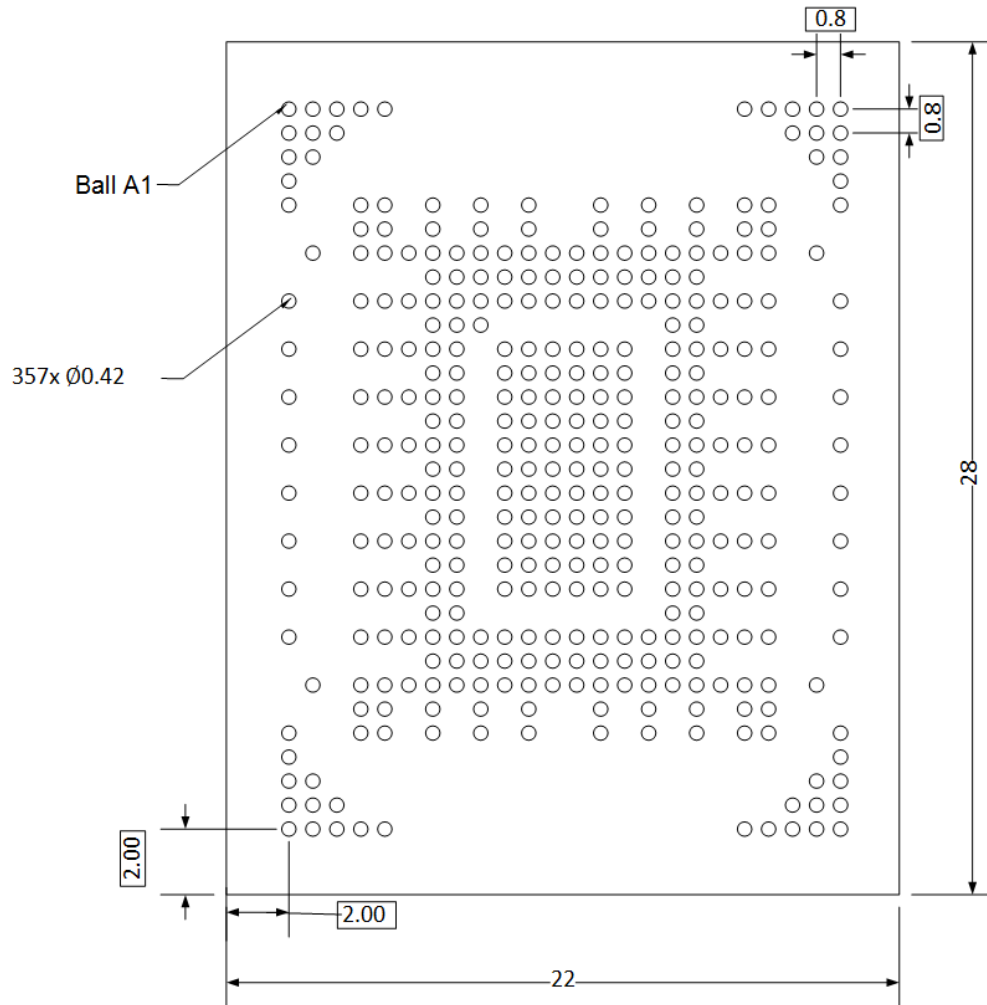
Recommended Land Pattern for M.2 Type 2228 BGA (Top View)
